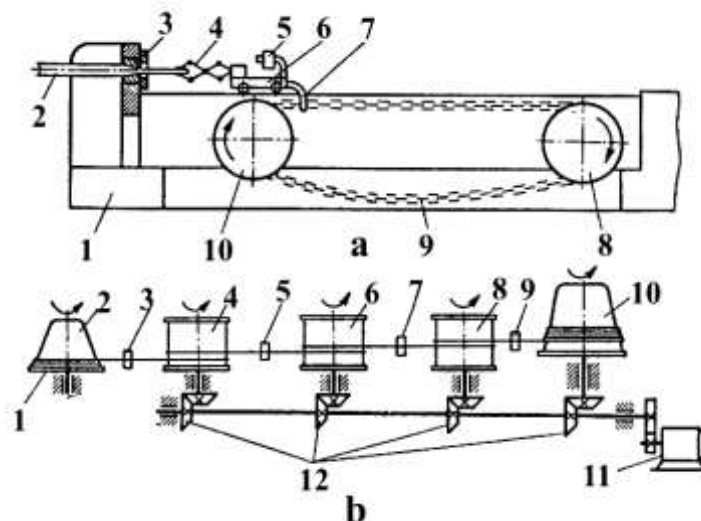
Chain (a) and drum (b) mills; for a: 1 -die-support; 2-billet; 3-reducing die; 4-6-capture device and carriage; 8, 10-sprockets; 9-chain; for b: 1-wire; 2, 4, 6, 8, 10-drums; 3, 5, 7, 9-reducing dies; 11-motor; 12-gears
